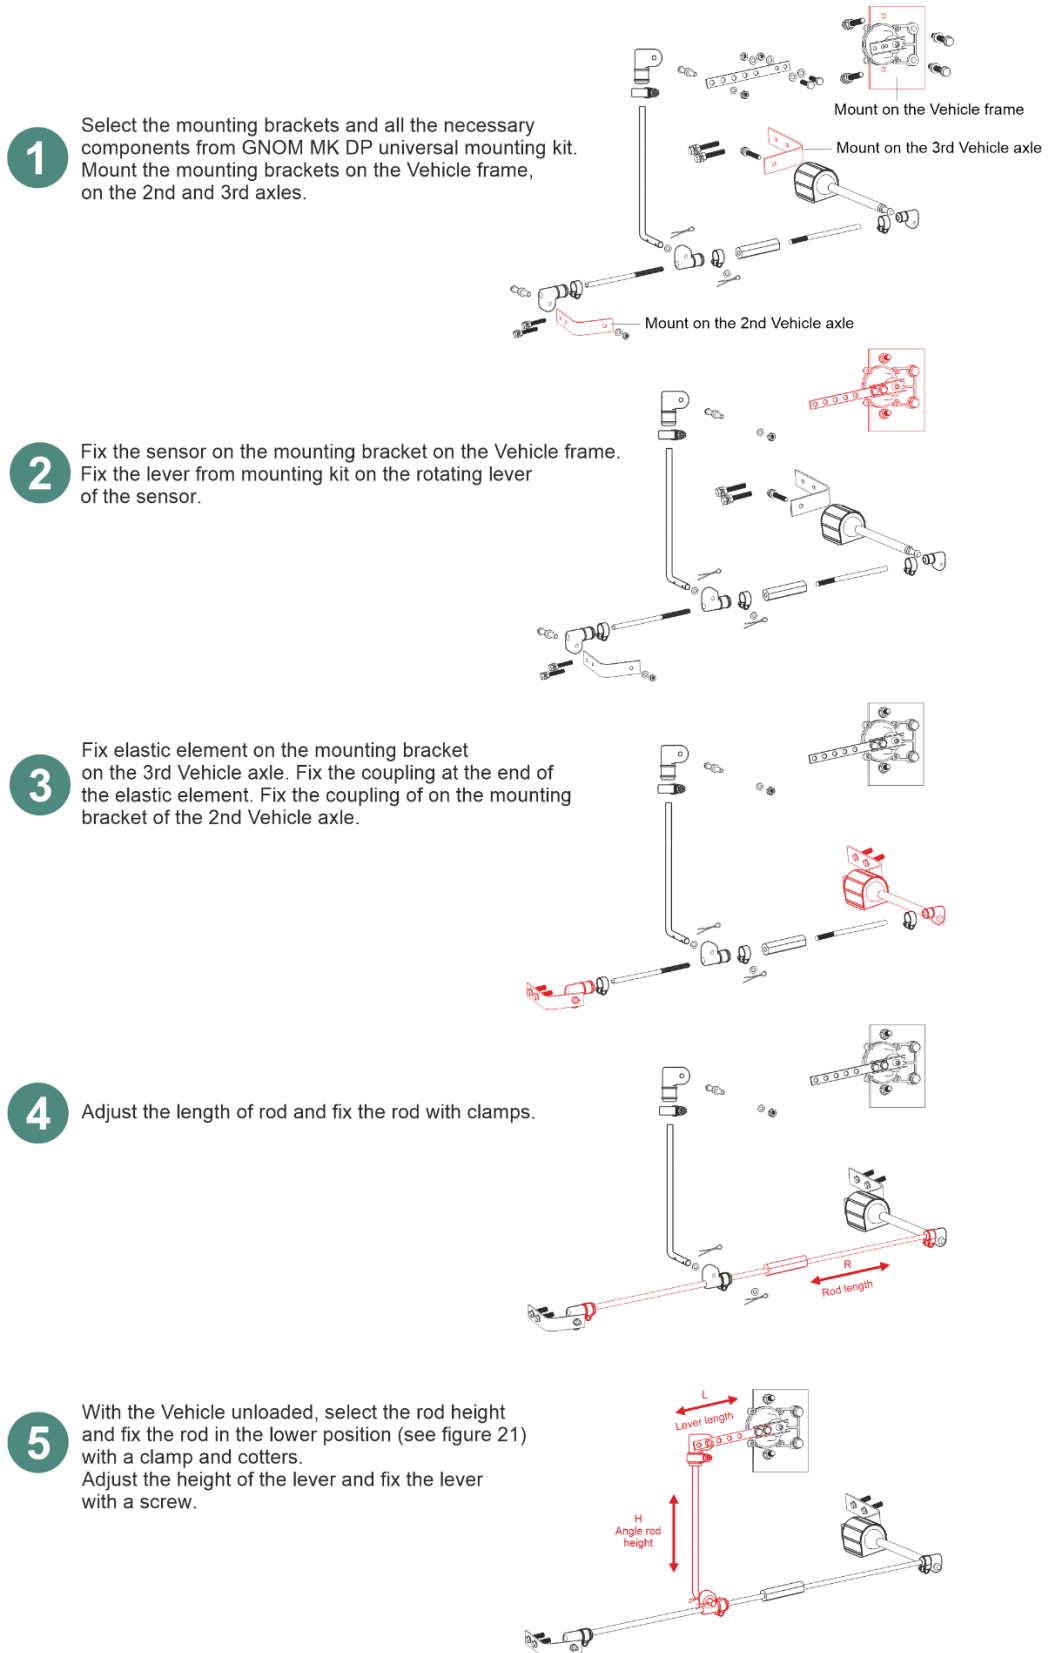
Stages of mounting [GNOM DP S7](#) according to the typical scheme for a three-axial Vehicle
